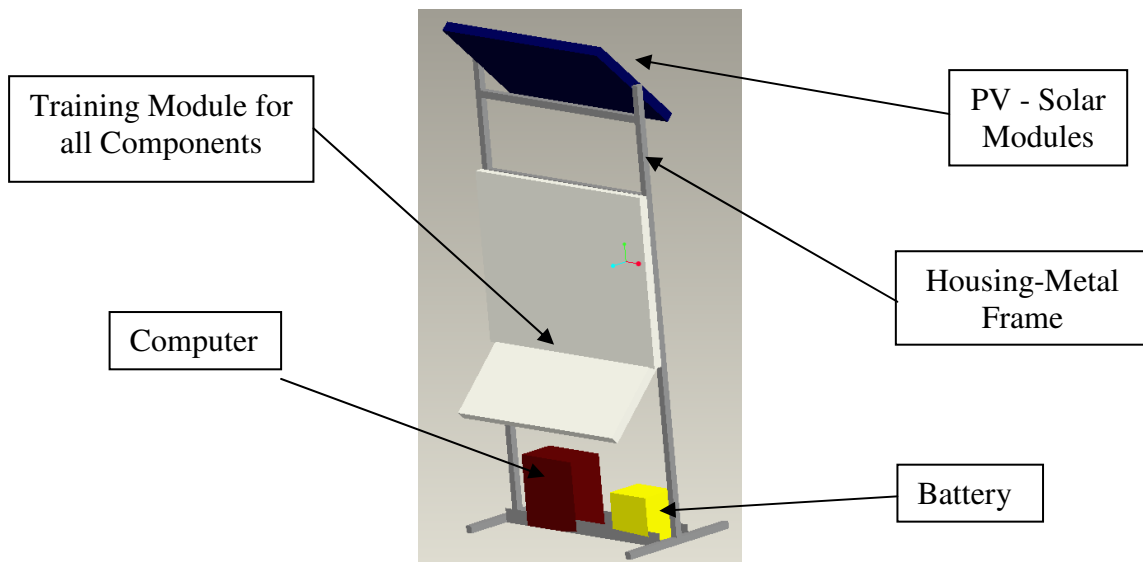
The Draft 3D Pro Engineer Wildfire Design of Training Unit
